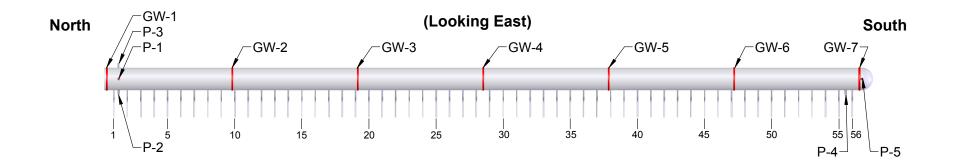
Sketches of the Upper Finishing Superheater Outlet header
